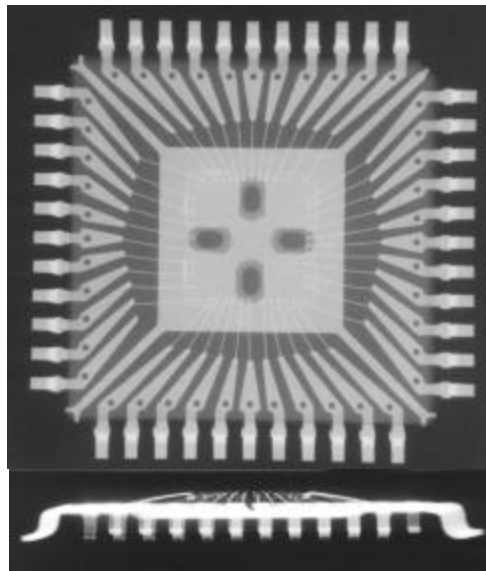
Top and side radiographic views of the part showing adequate lead frame design, wire dressing and layout.
